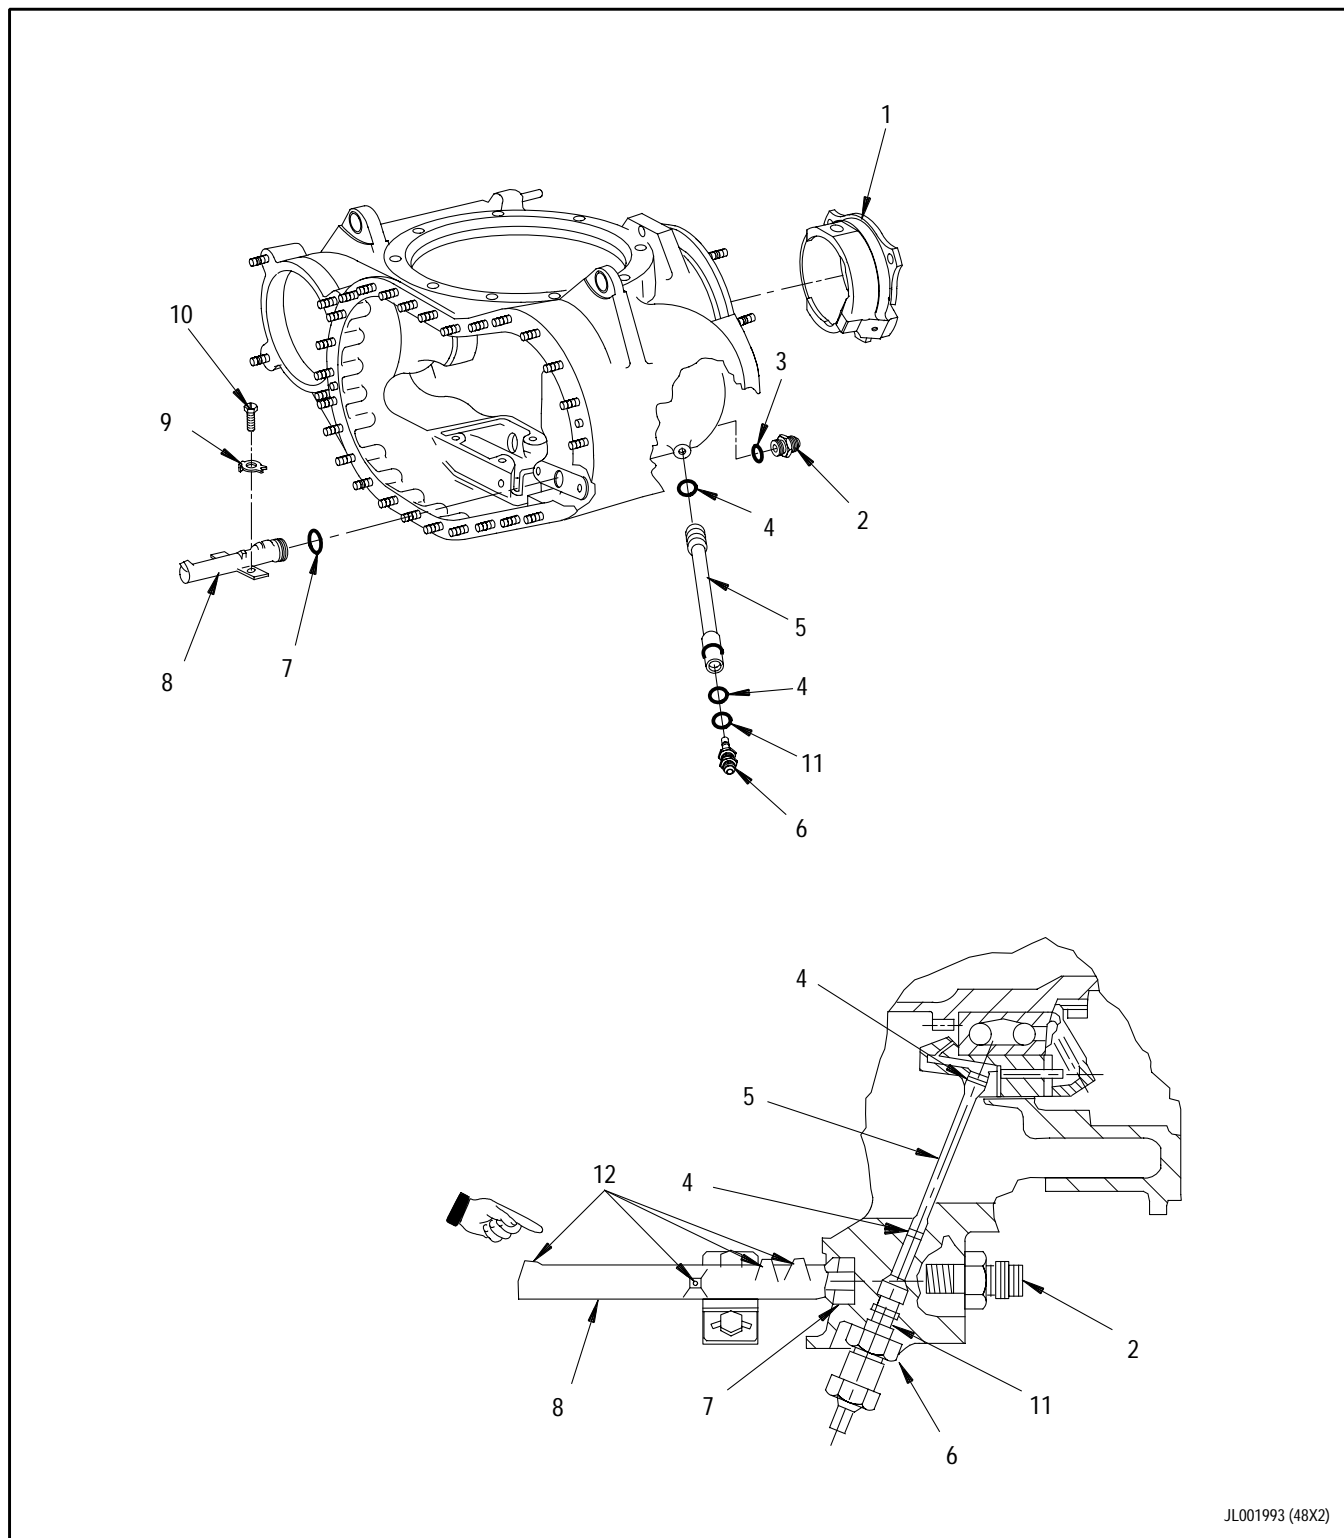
Gearbox (Rear) Housing - Installation of Fittings and Nozzles for Flow Test
